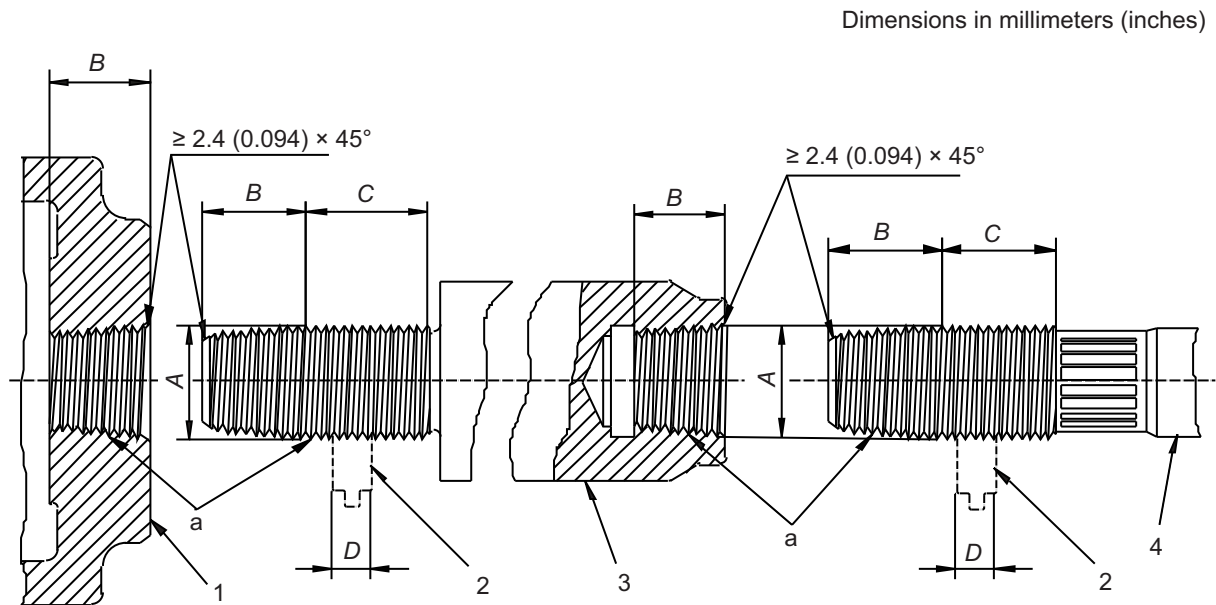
Fluid End of Single-acting Mud-pump Piston Rod and Piston Body Bore
